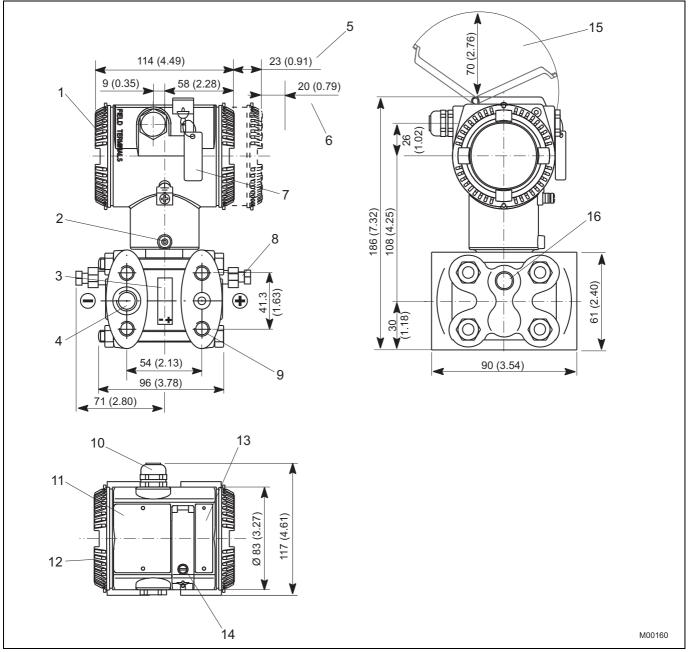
Dimensions in mm (inches), deviations in the drawing are possible
